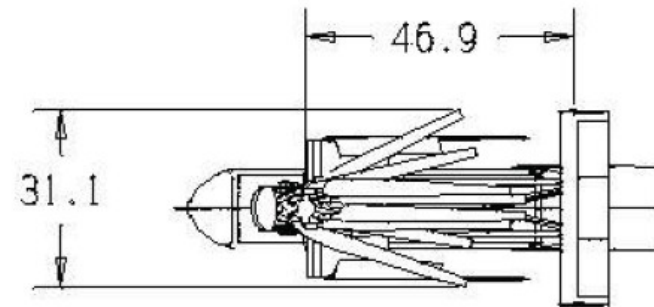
Dimensioned engineering drawing of MTR-JHL in stowed configuration.
